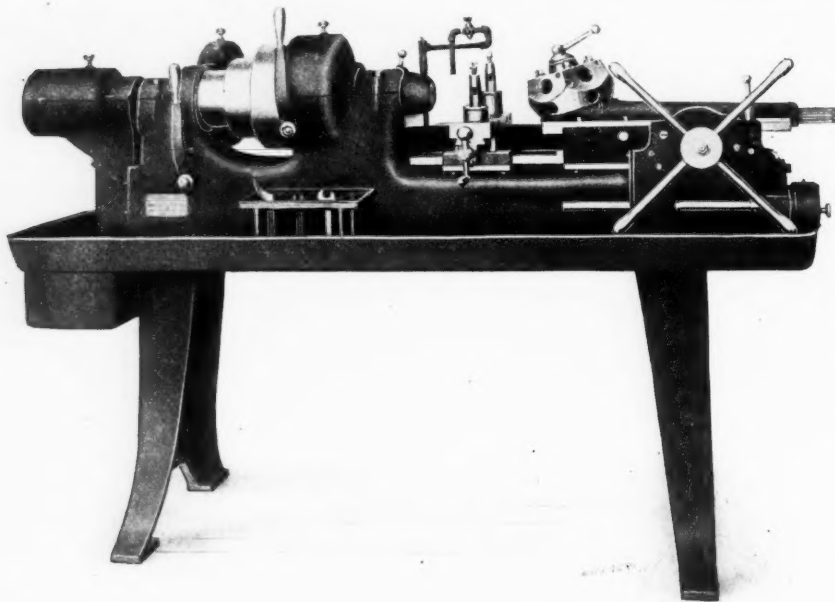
Wood Tilted-turret Screw Machine with Friction Geared Head and Geared Automatic Feed to the Turret Slide
